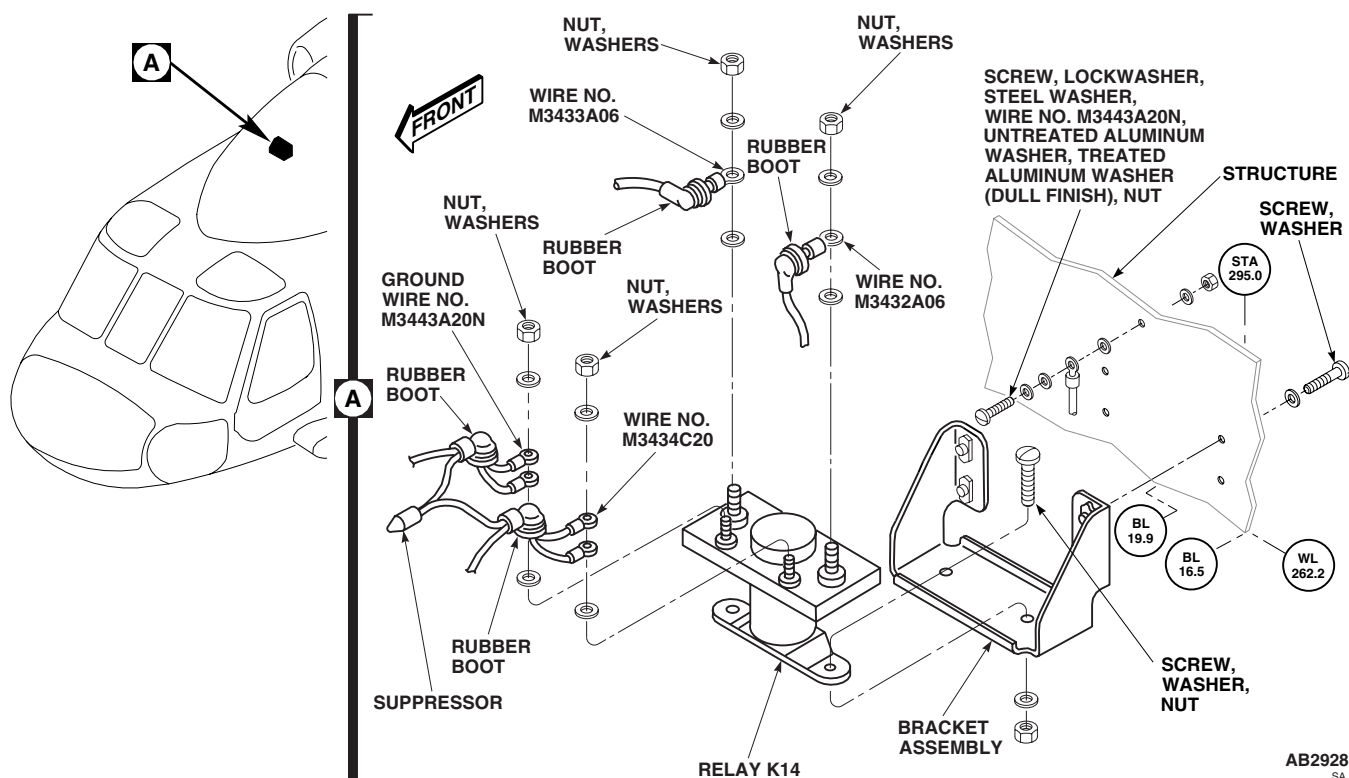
Remove/Install K14 Bracket, Relay, and Suppressor.
